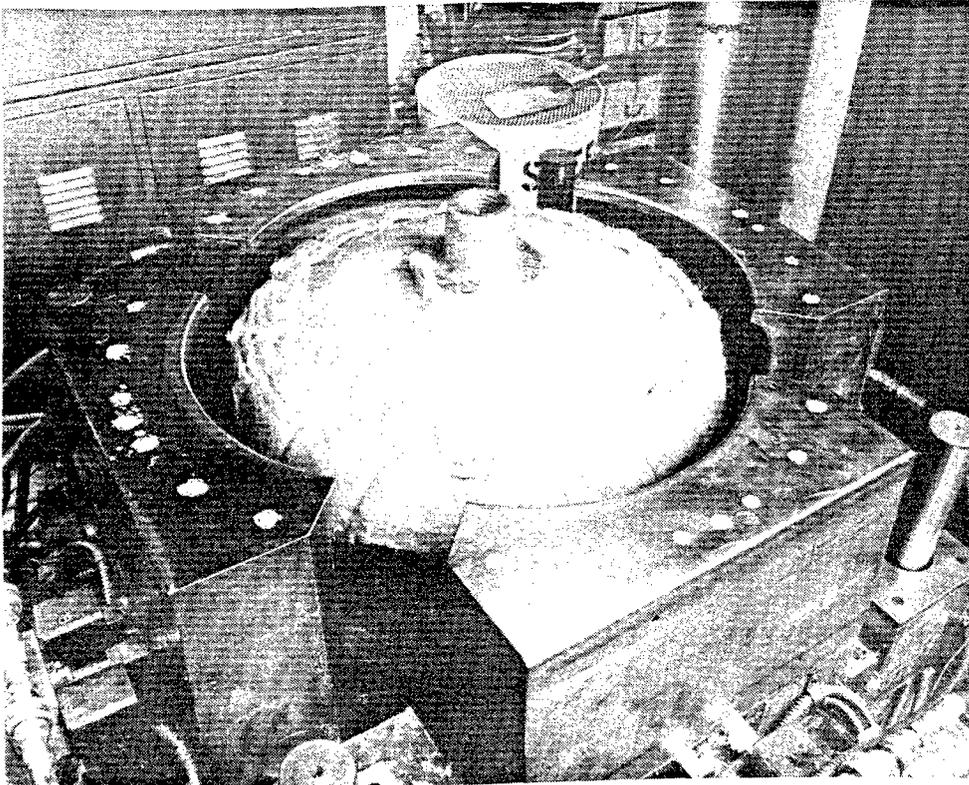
1. Bottom Mold Half with Slides Retracted and Roadwheel Preform in Place
